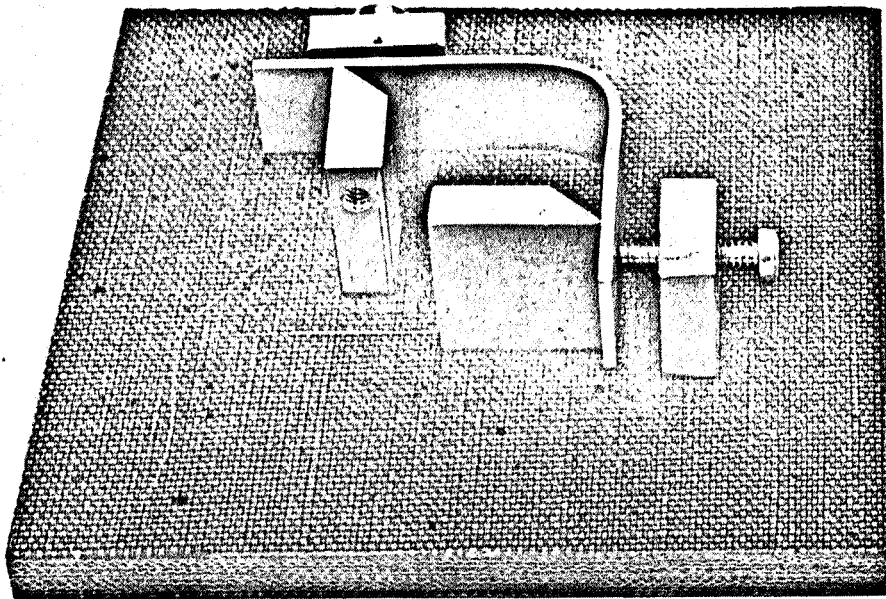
Type B Specimen Mounted in Knife-edge Test Fixture
